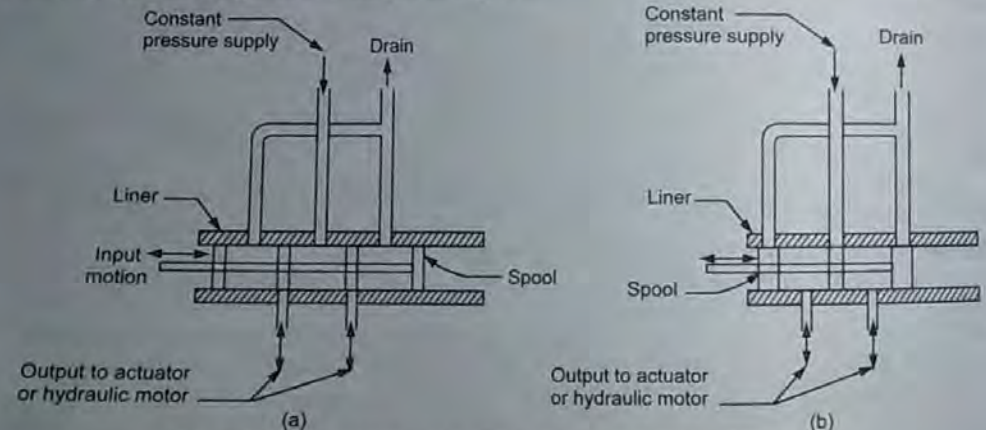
Cylindrical spool valves : (a) 4-land, and (b) 3-land
